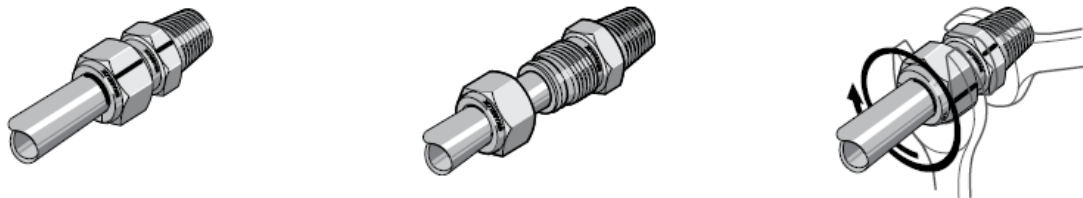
When reassembling, mark the connector prior to disassembling tighten until the mark and tighten slightly (1/6 is a good indication) with a wrench
